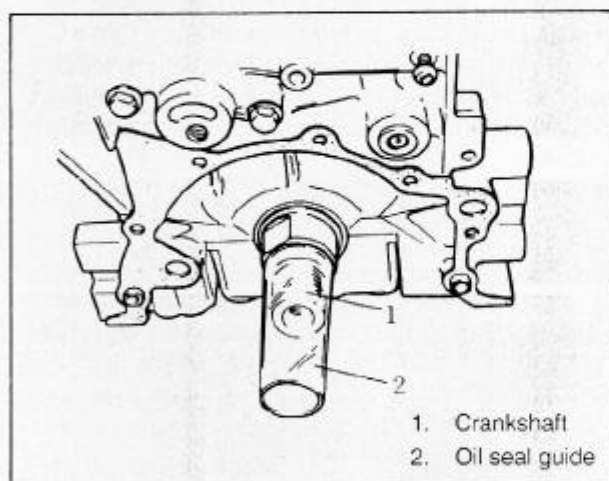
A — 36 INSTALLATION OF OIL SEAL GUIDE
